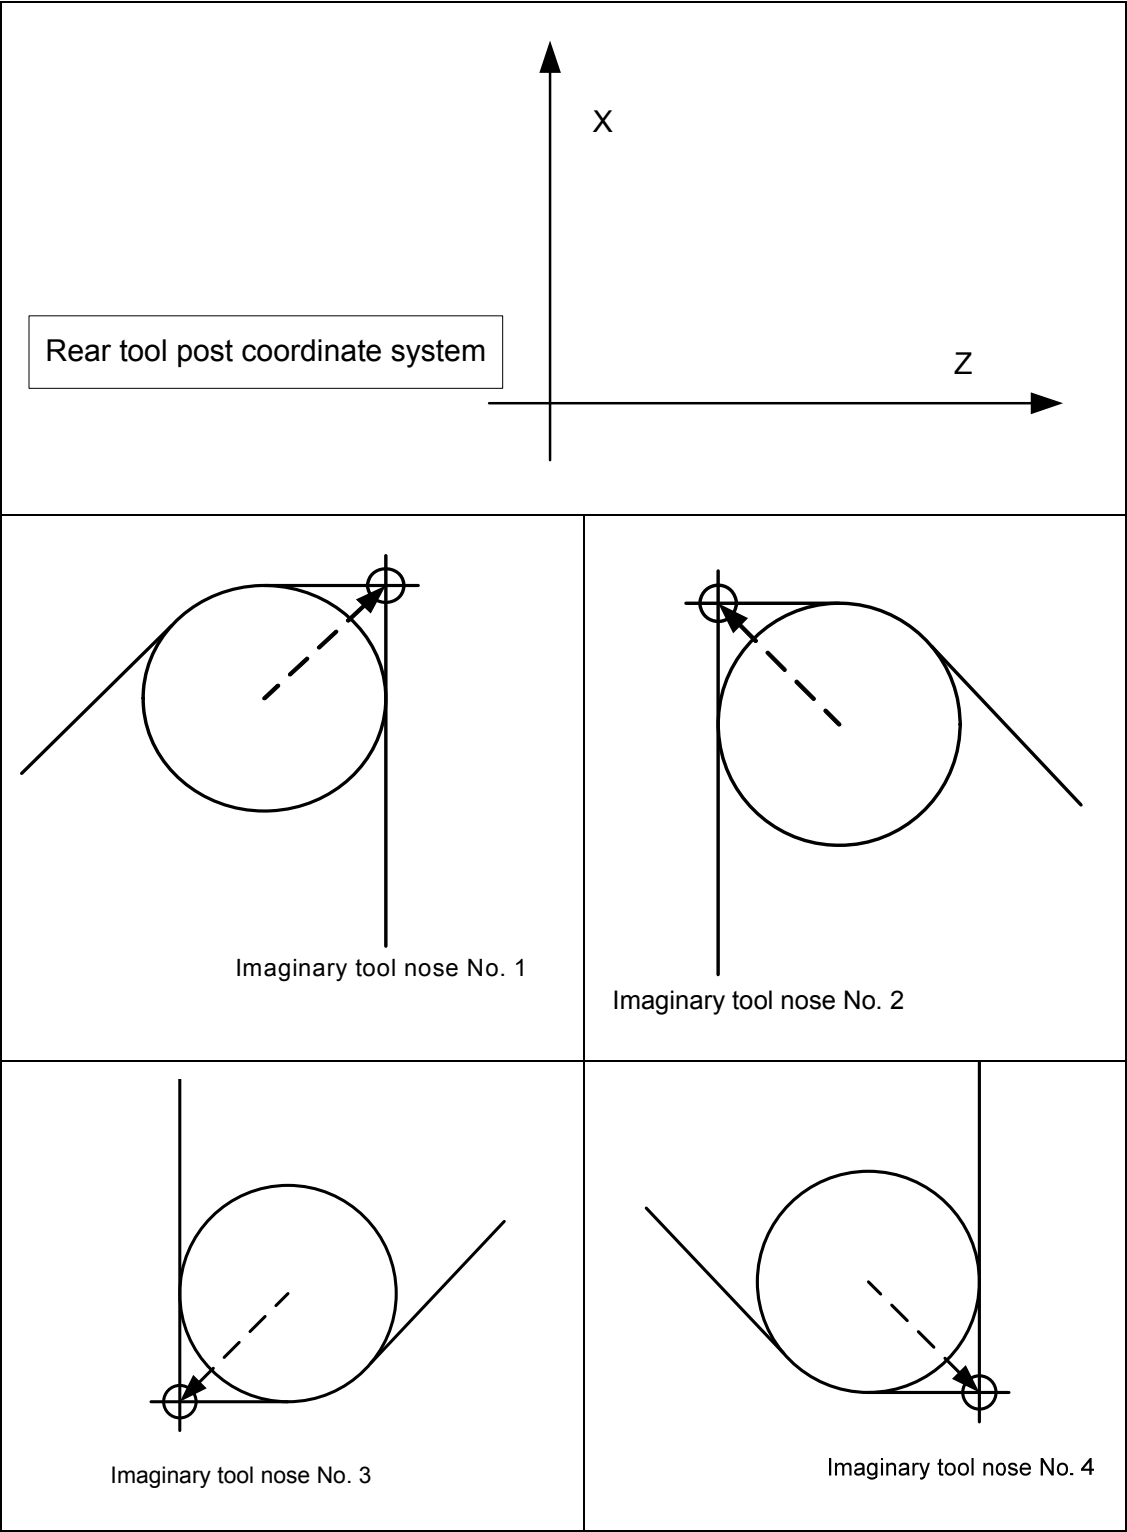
Tool path in imaginary tool nose programming
